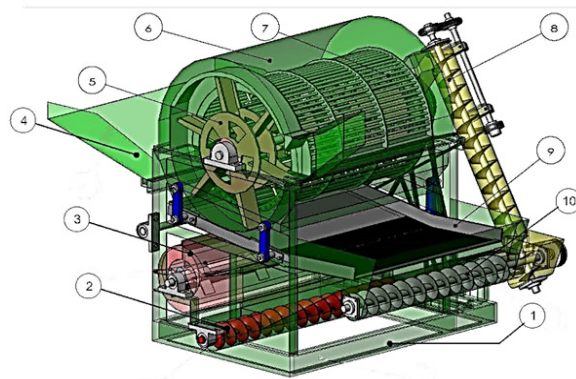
Components of soybean thresher : (1) machine stand (2) clean grain auger (3) cleaning fan (4) feed tray (5) cylinder (6) cover cylinder (7) concave (8) grain return auger (9) cleaning sieve (10) tailings auger
